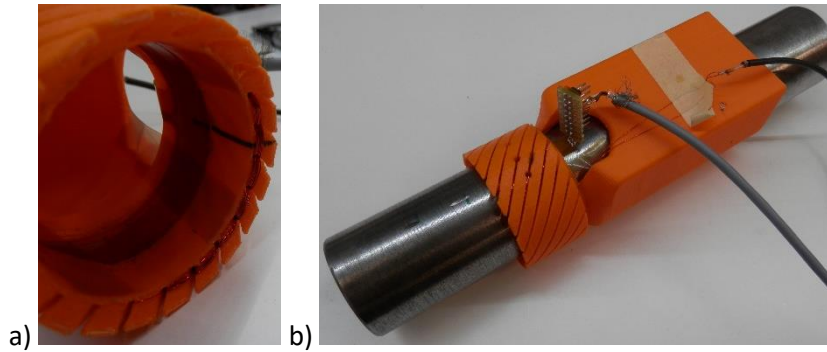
Outer surface inspection probe; a) flat flexible pick-up coils inside the chassis; b) EC probe around the steel sample.
